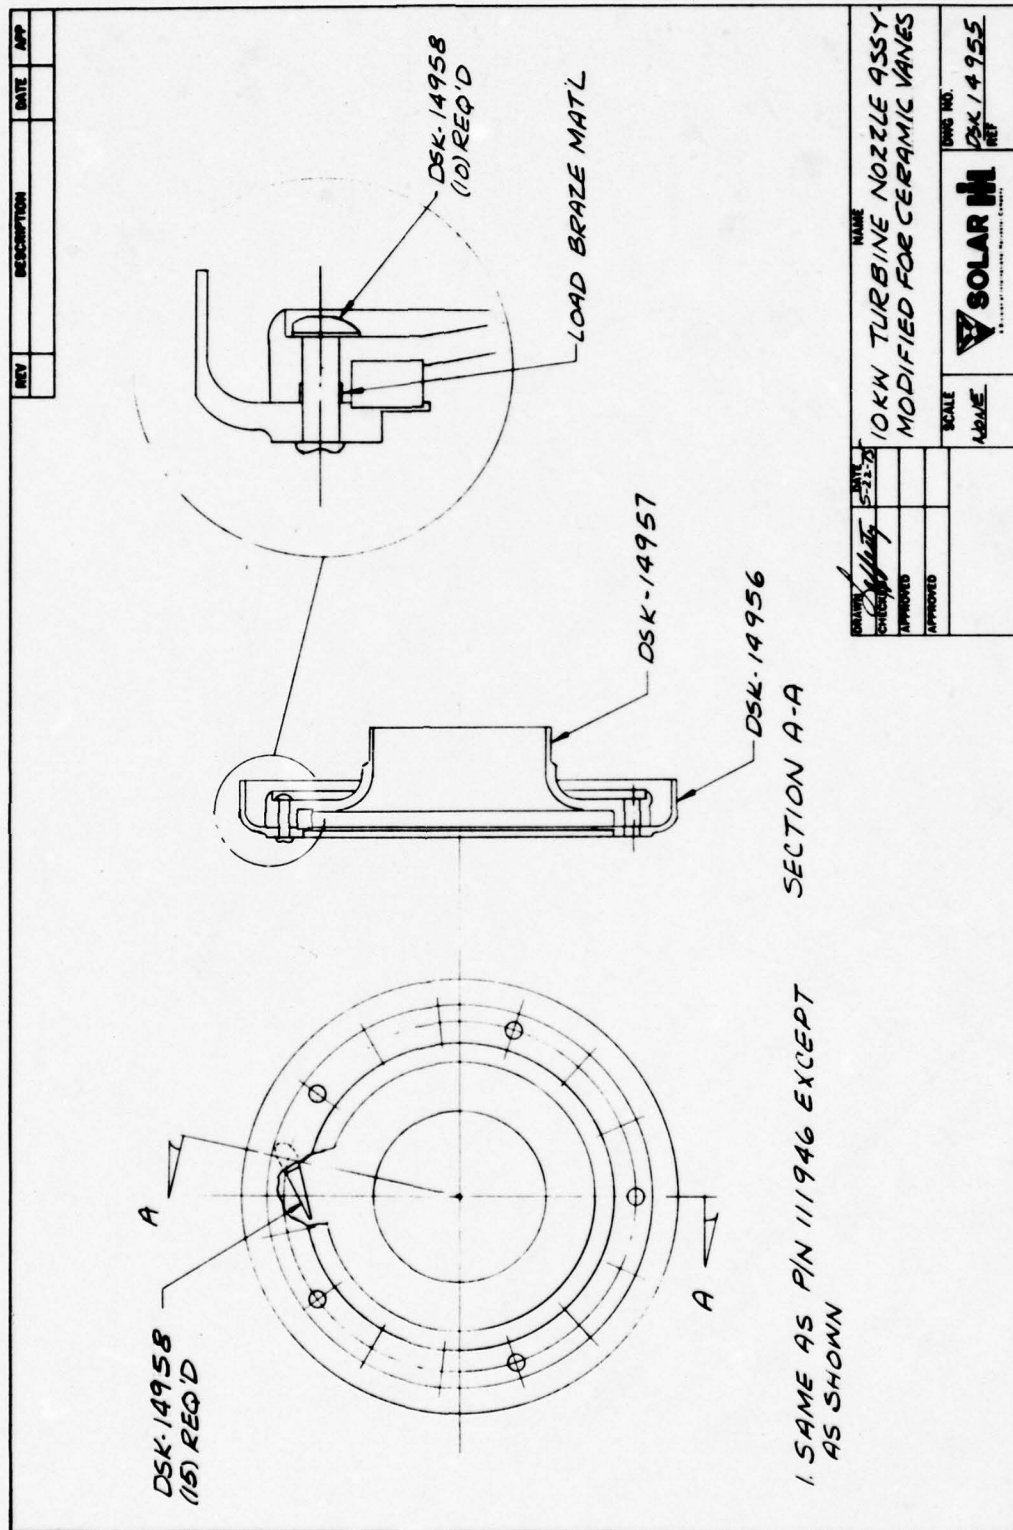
10 kW Turbine Nozzle Assembly With Ceramic Vane Inserts
